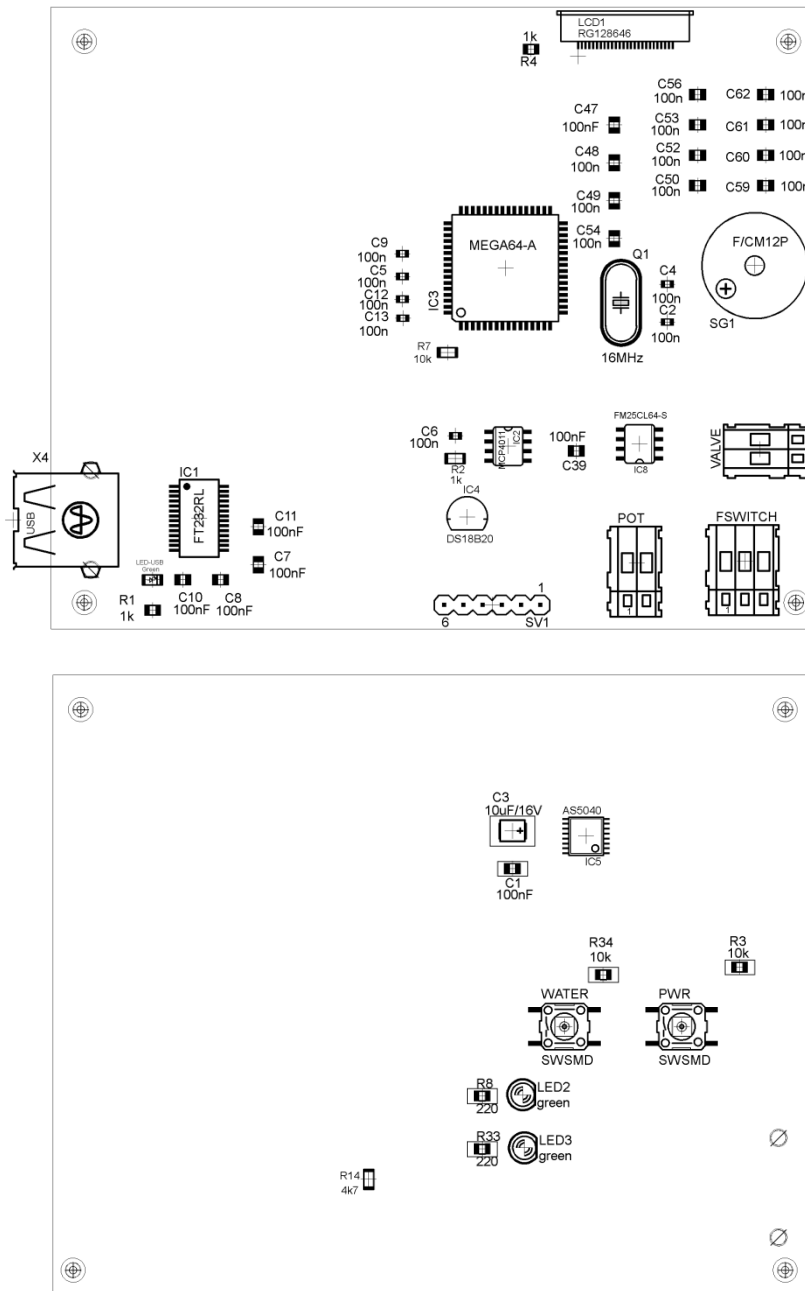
Control circuits assembly diagram a) bottom side b) top side
